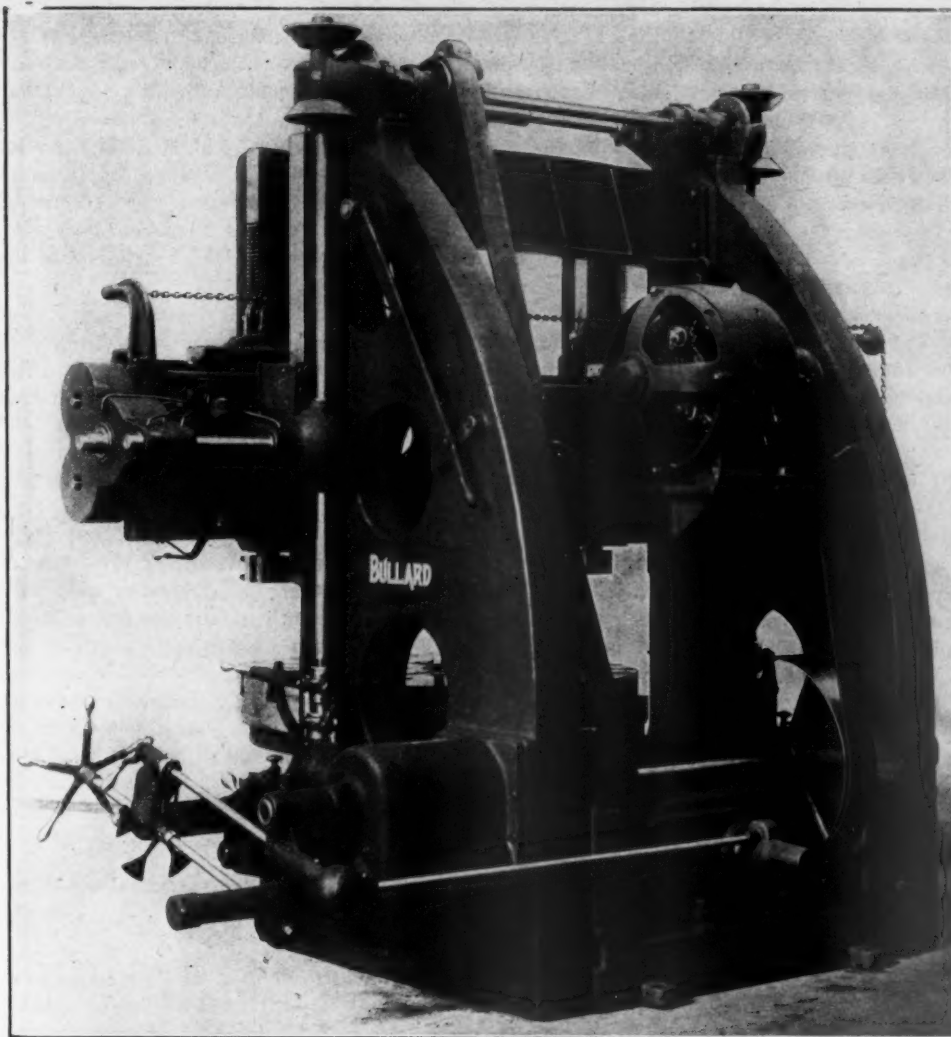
REAR VIEW OF BULLARD BORING MILL, SHOWING APPLICATION OF MOTOR DRIVE.
